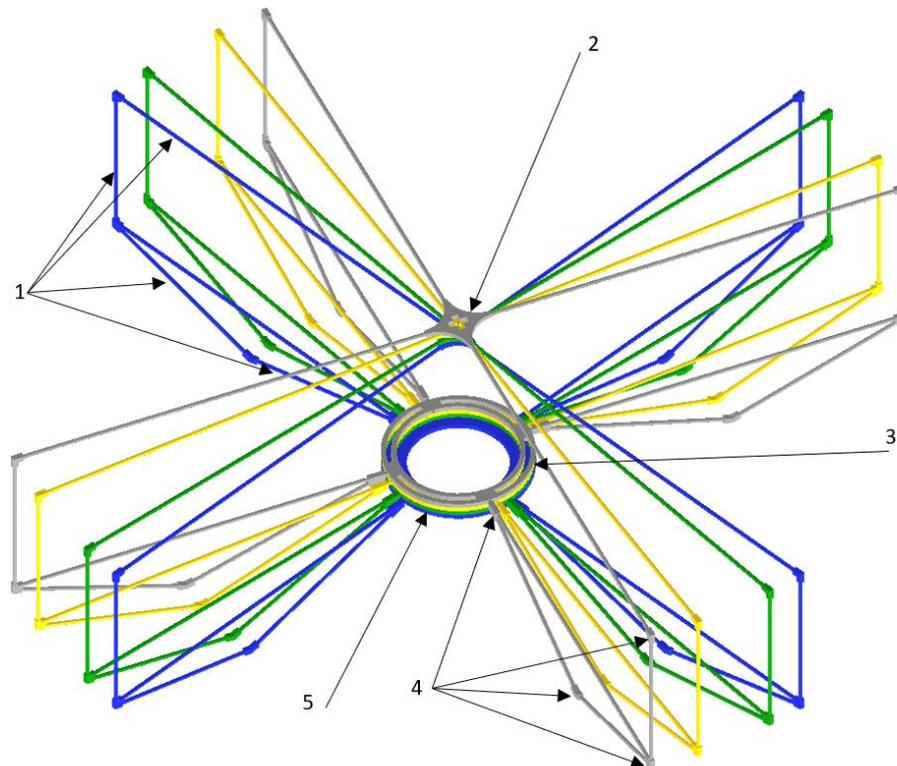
View of 4 frames with assembled parts. Each frame, components are highlighted with different colors
